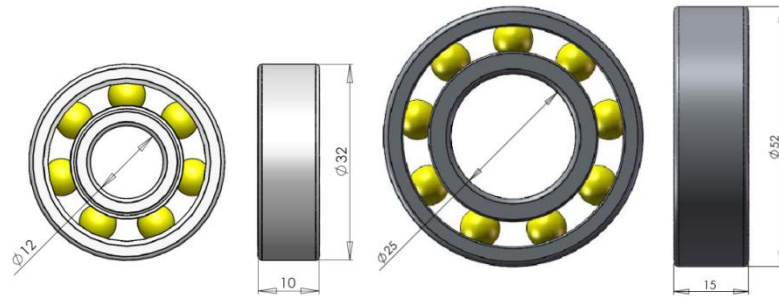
Nominal dimensions of the 6201 (left) and W6205 (right) bearings. All dimensions are in [mm].
